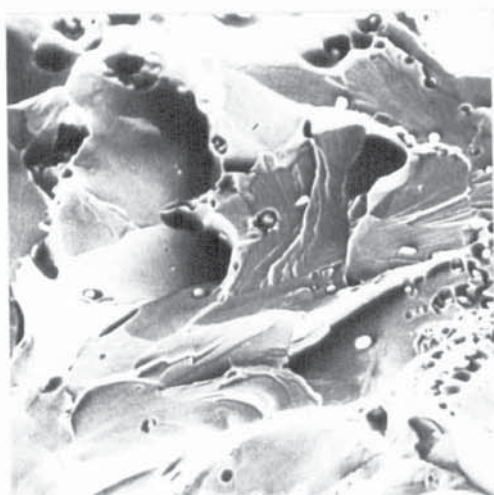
c. Cleavage fracture Steel D30,specimen307, 750X.
